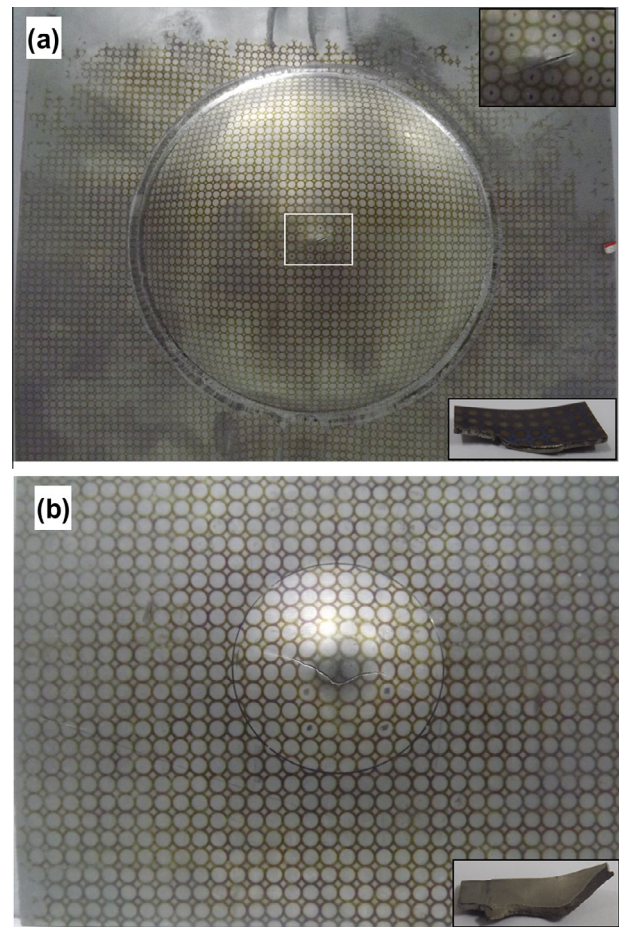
Crack shapes and fracture macroscopic morphology (a) electromagnetic bulging, and (b) Erichsen test.
